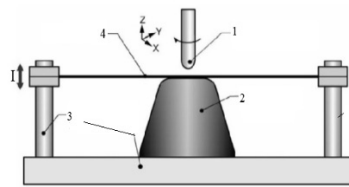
Two-point incremental forming with spherical tip tool and full die, [16]: 1 - Main tool; 2 - Full die; 3 - Fixture; 4- Raw material; 5 – Raw material; I - Tool penetration movement in Z-axis direction
